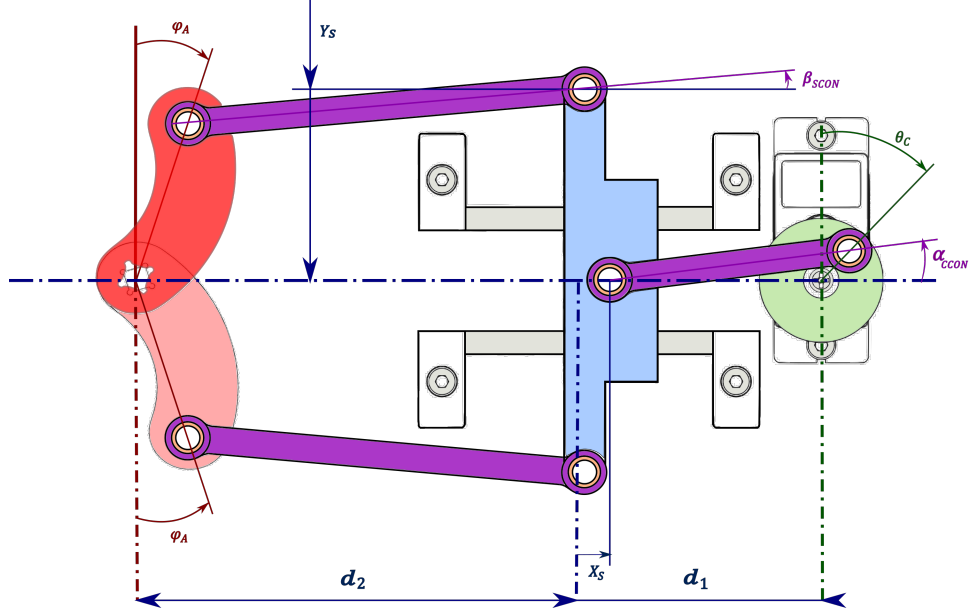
Another control surfaces driving mechanism based on the crank-rocker mechanism.
